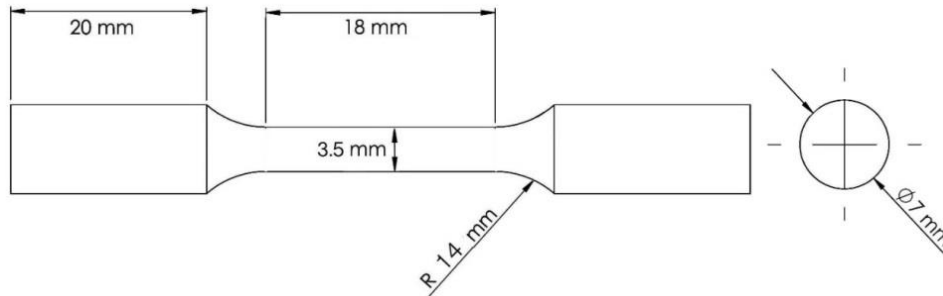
Dimensions of dog-bone cylindrical fatigue specimen
